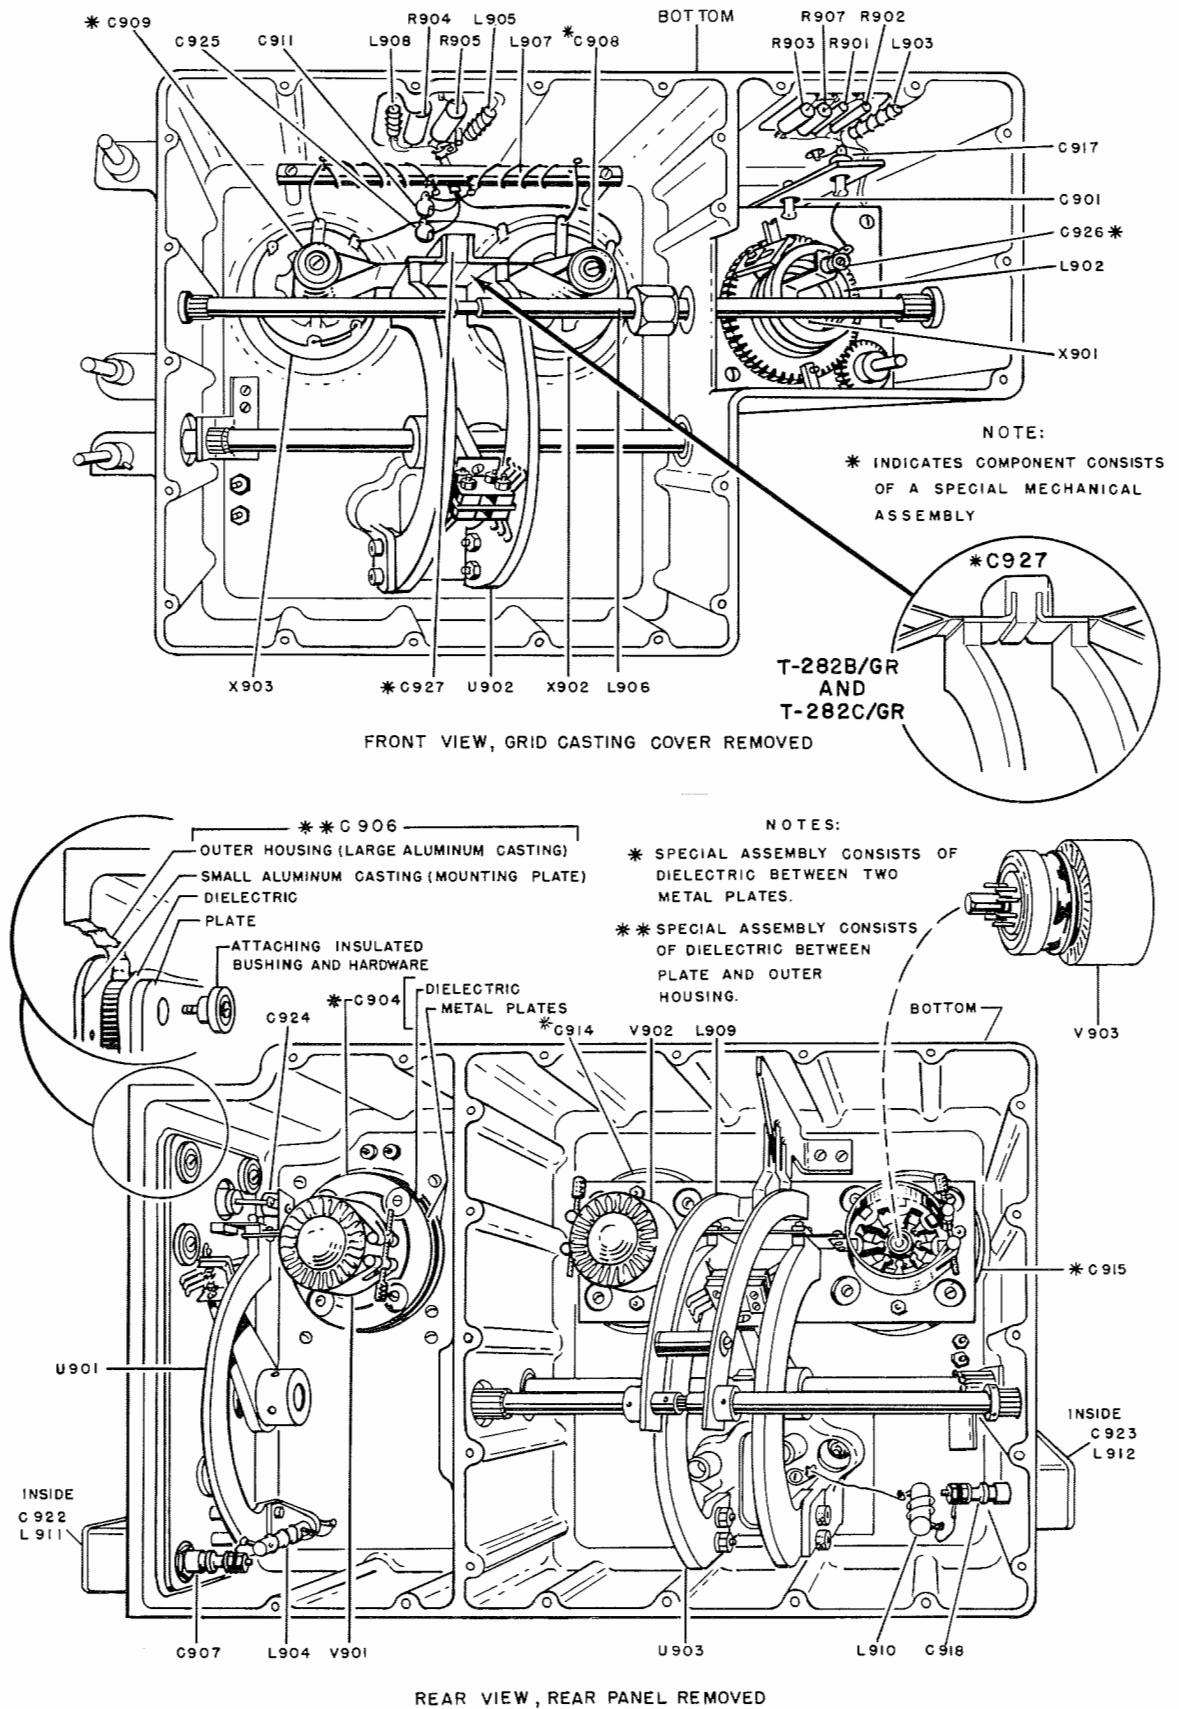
Radio Transmitter, Driver-Power Amplifier Assembly, Location of Electrical Parts
